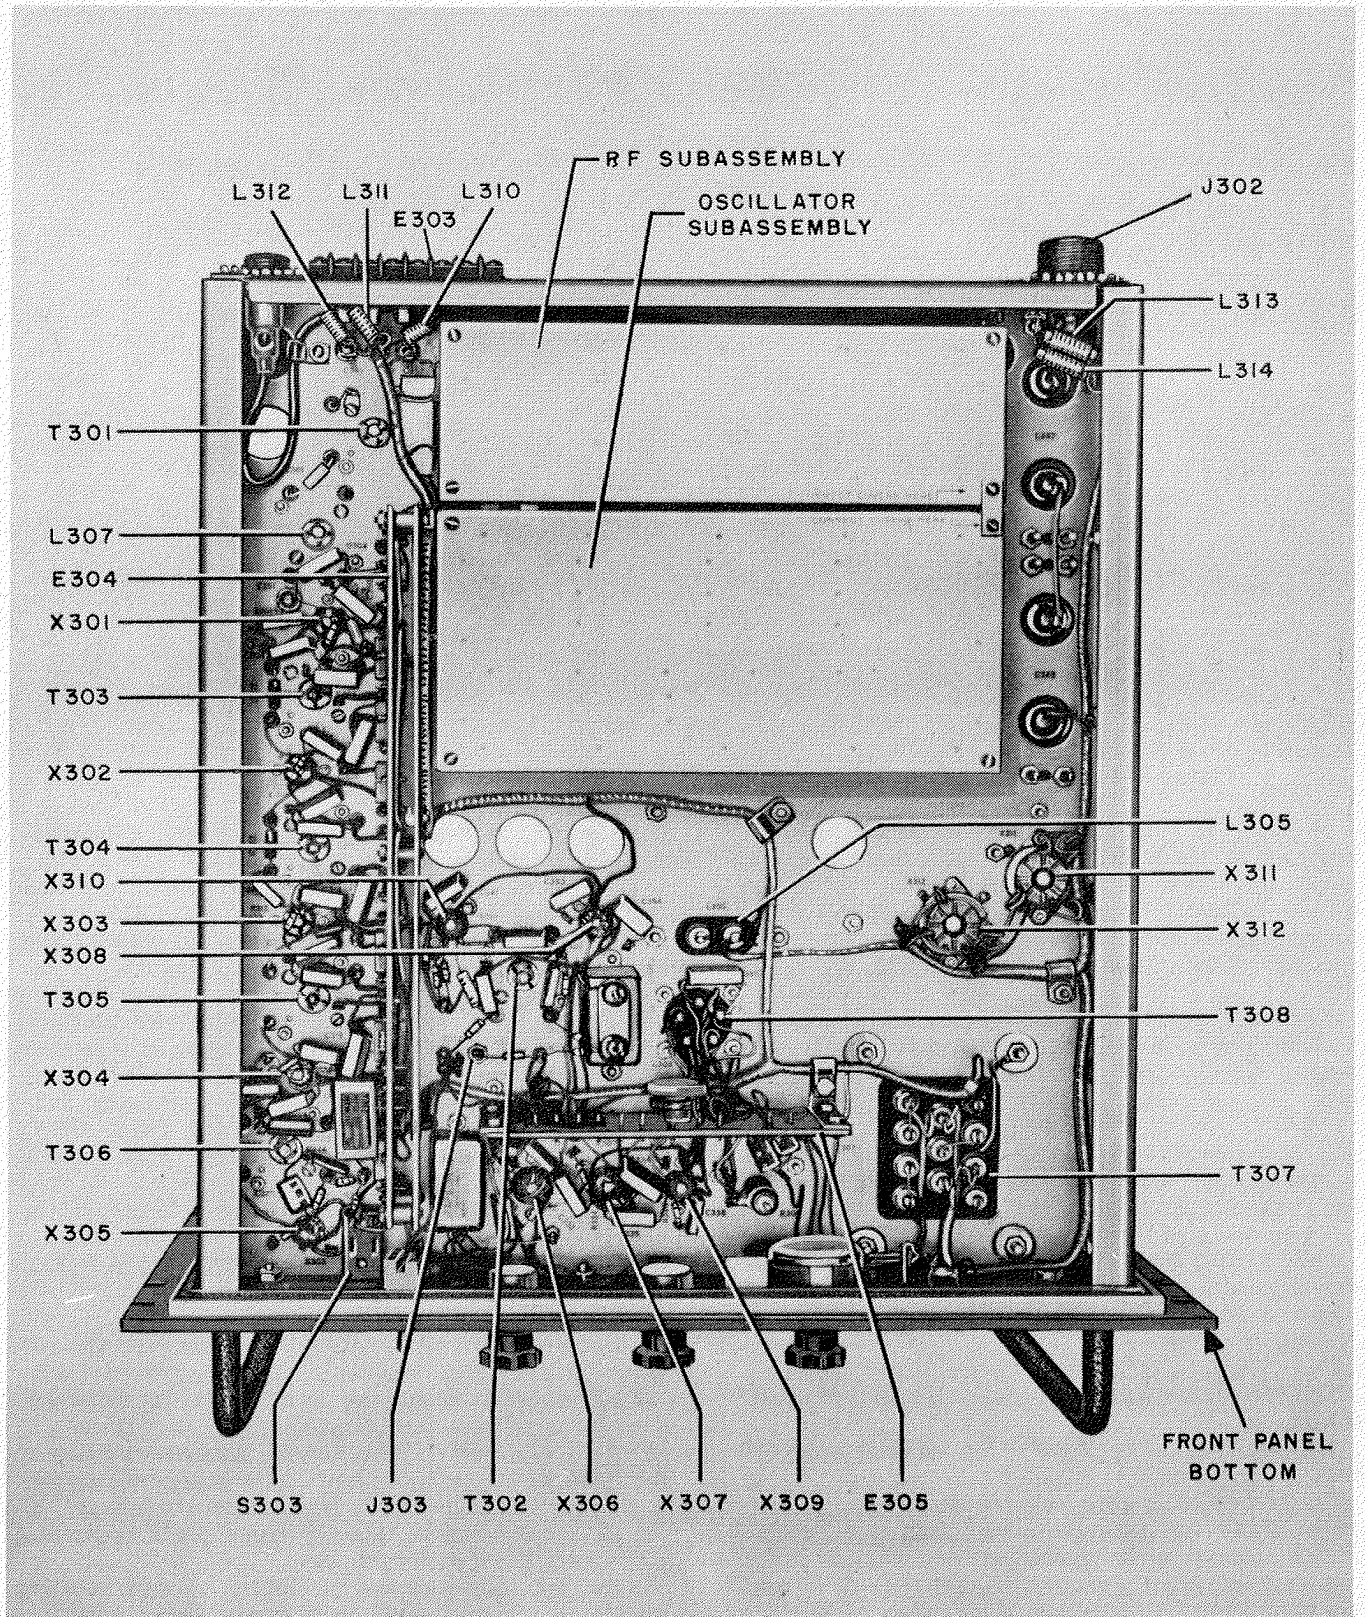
Radio Receiver R-361/GR, Bottom View, Location of Electrical Parts on Main Chassis
